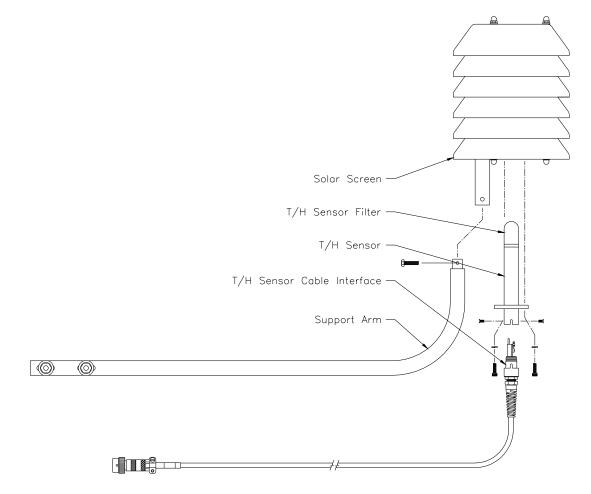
THS-3 Temperature & Humidity Sensor Exploded View
